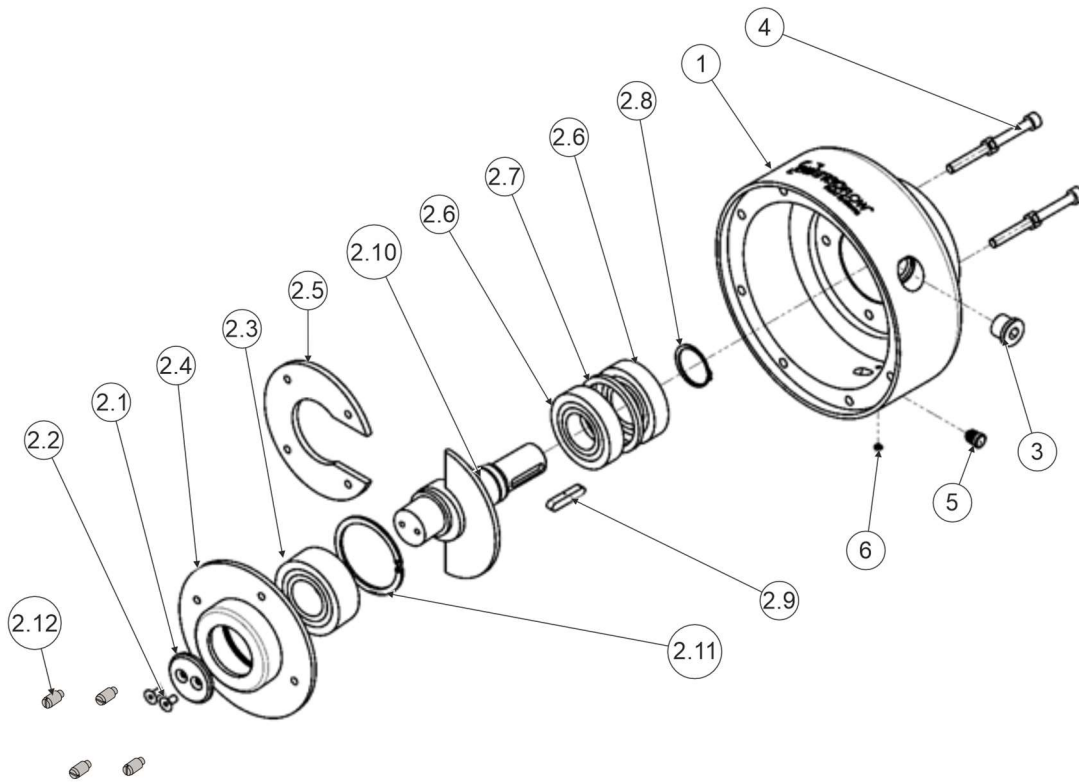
Ring drive PQ5A/PQ5P sub-assembly
